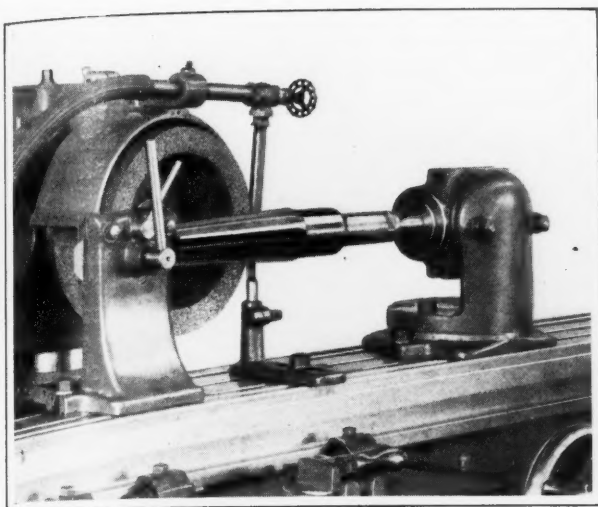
Using the Cutter and Reamer Holder and Tailstock in Sharpening a Reamer
